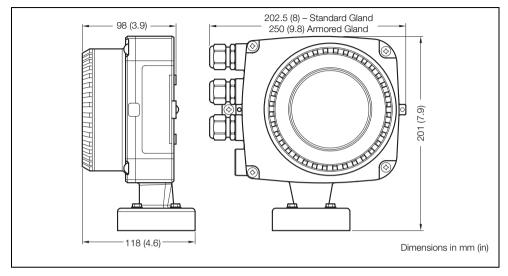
Integral Transmitter Dimensions (Standard Gland Shown)
